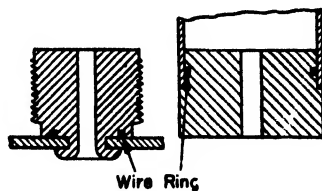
Brazing wire inserted in a groove in the joint.
